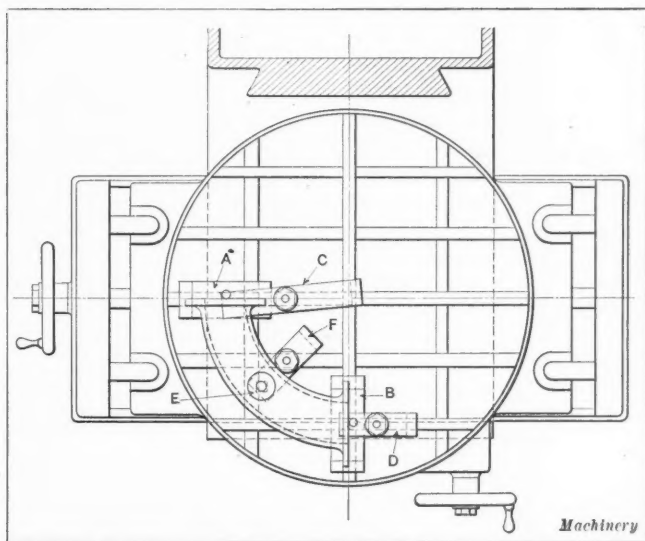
Method of setting up Work on Circular Attachment of Milling Machine
